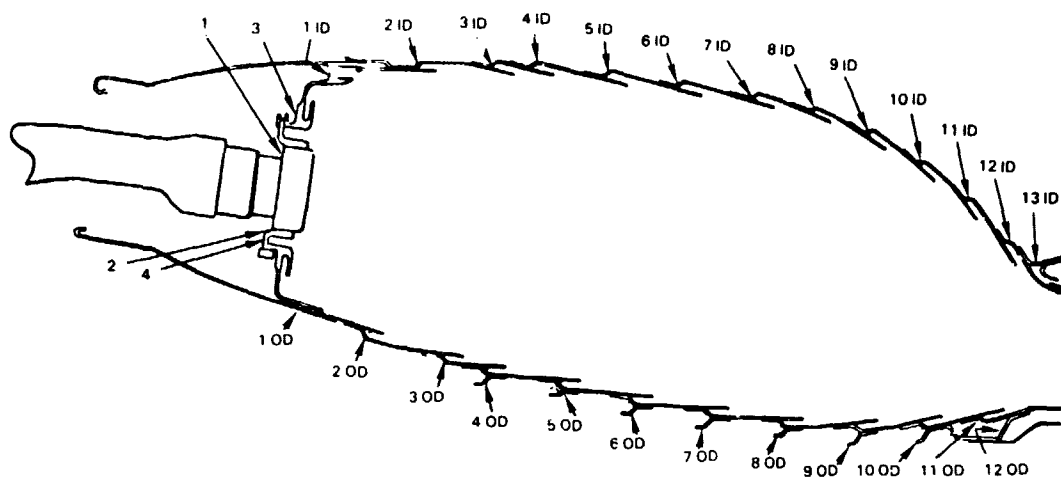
Combustor Hole Pattern in JT9D-7 Bulkhead Burner;
